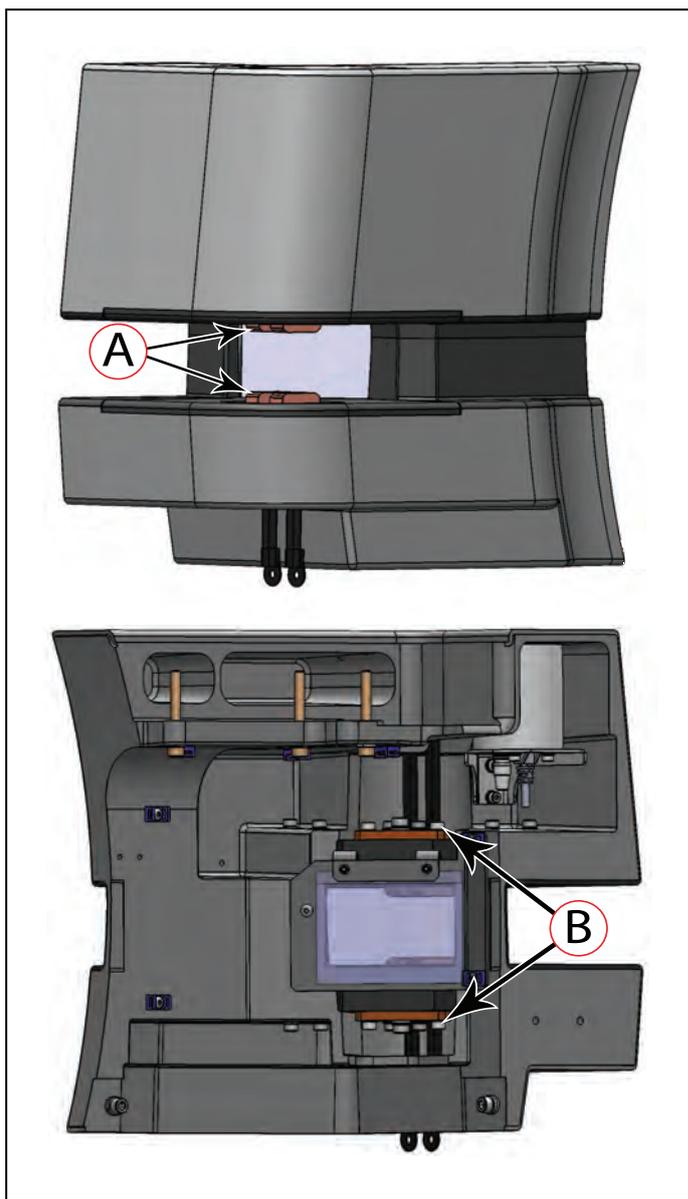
(A) Top and Bottom Charging Contacts, and (B) M5 Screws Attaching the Electrical Connections to the Corner Casting
